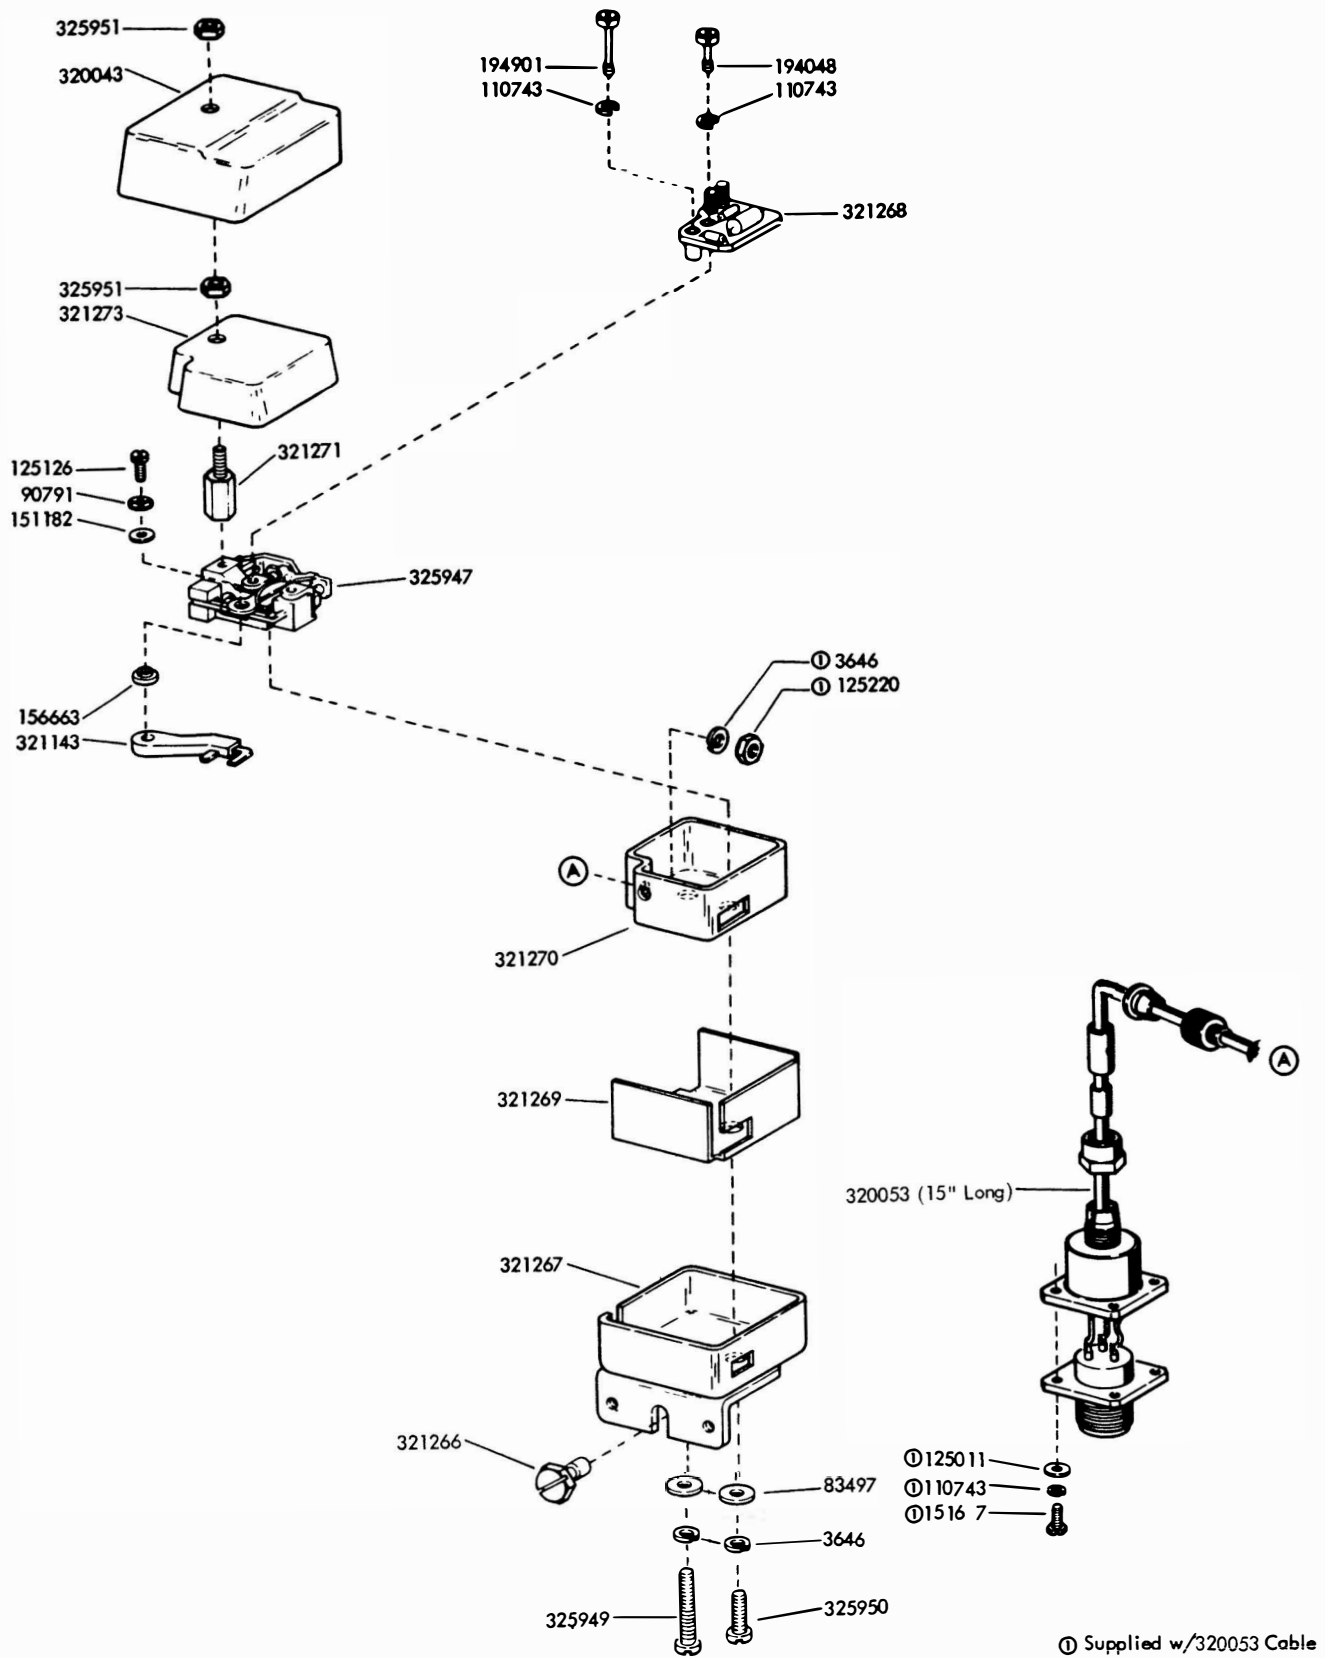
323645 CONTACT BOX ASSEMBLY (LK and LTRK)
